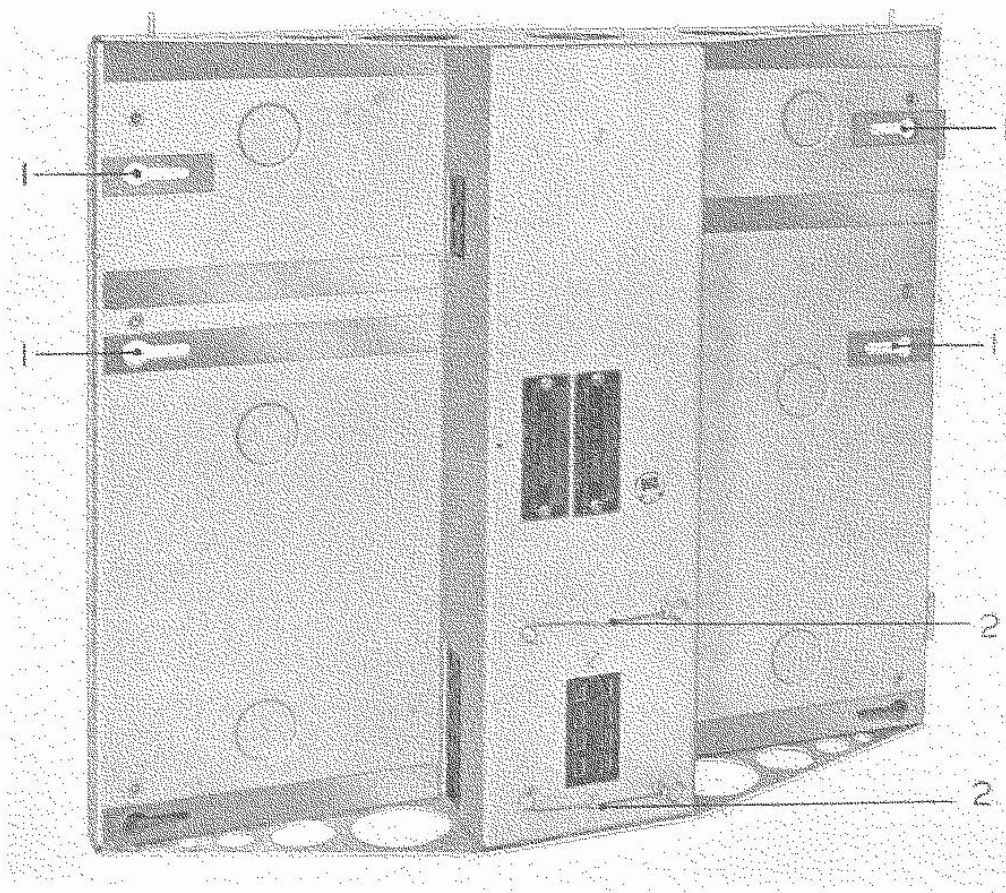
VIEW OF UPPER SIDE OF CHASSIS
